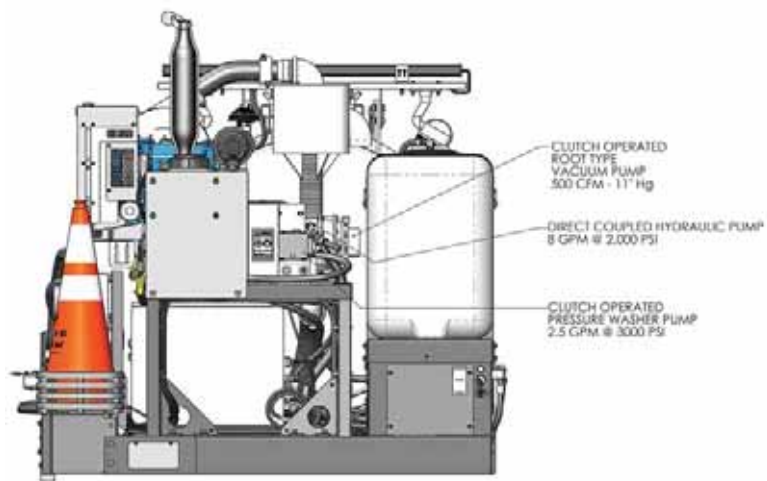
The drawing shows the front view of the SB VMS (both engine configurations).
